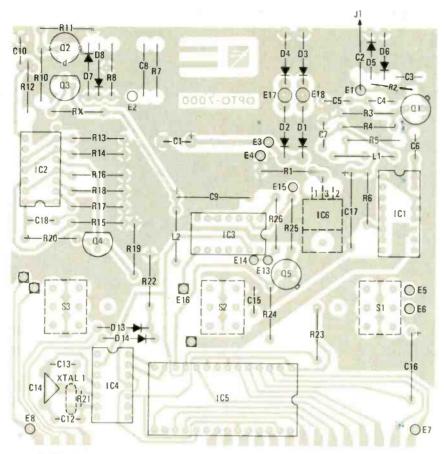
PARTS PLACEMENT DIAGRAM for the main board. When board is installed most parts are toward the inside or bottom side of the case. Ground plane with switches faces upward.
